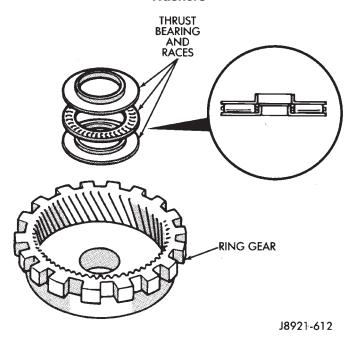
Removing/Installing Ring Gear Thrust Bearing And Races
